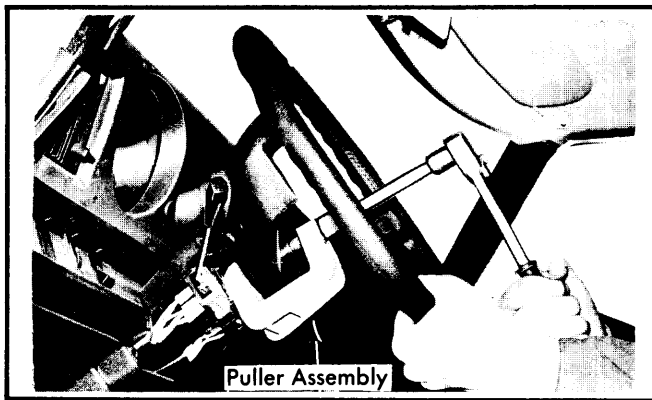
Using a Universal Puller Tool to Remove Steering Assembly
